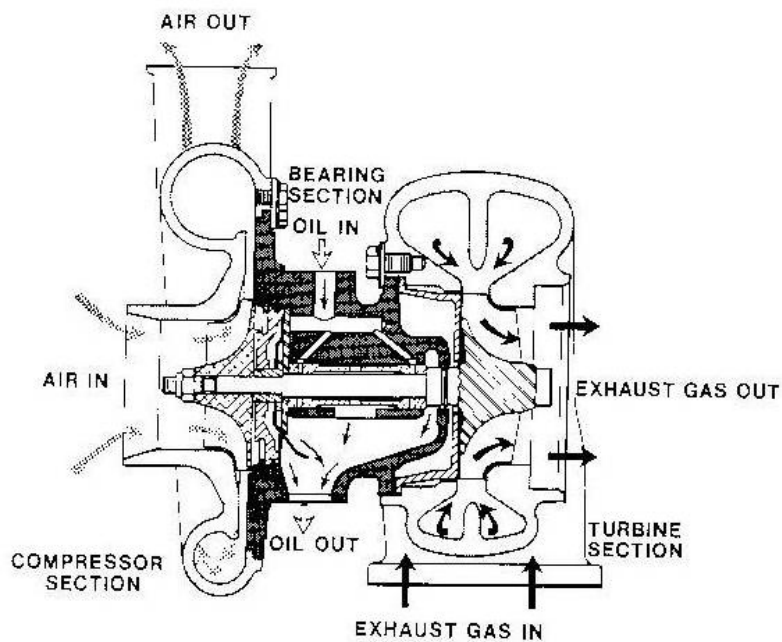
Sectioned drawing of turbocharger components. (Retrieved from Hugh MacInnes' *Turbochargers*, courtesy of Schwitzer)
